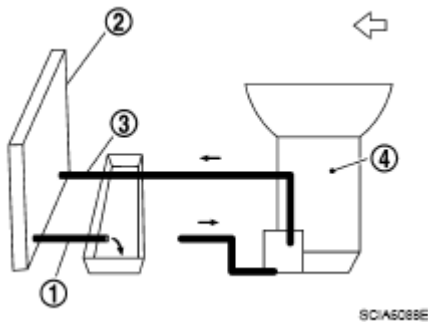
Identifying CVT Fluid Cooler Hose (Outlet Side), CVT Fluid Cooler Hose (Inlet Side) And Radiator
